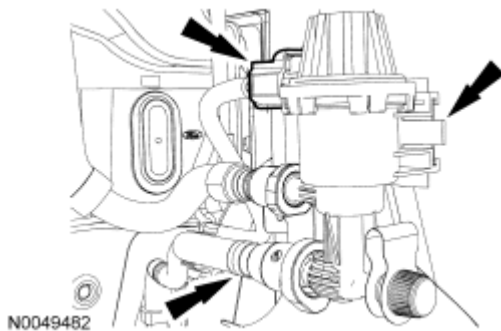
Disconnecting Lower EVAP Tube & Electrical Connector From EVAP Canister Purge Valve
